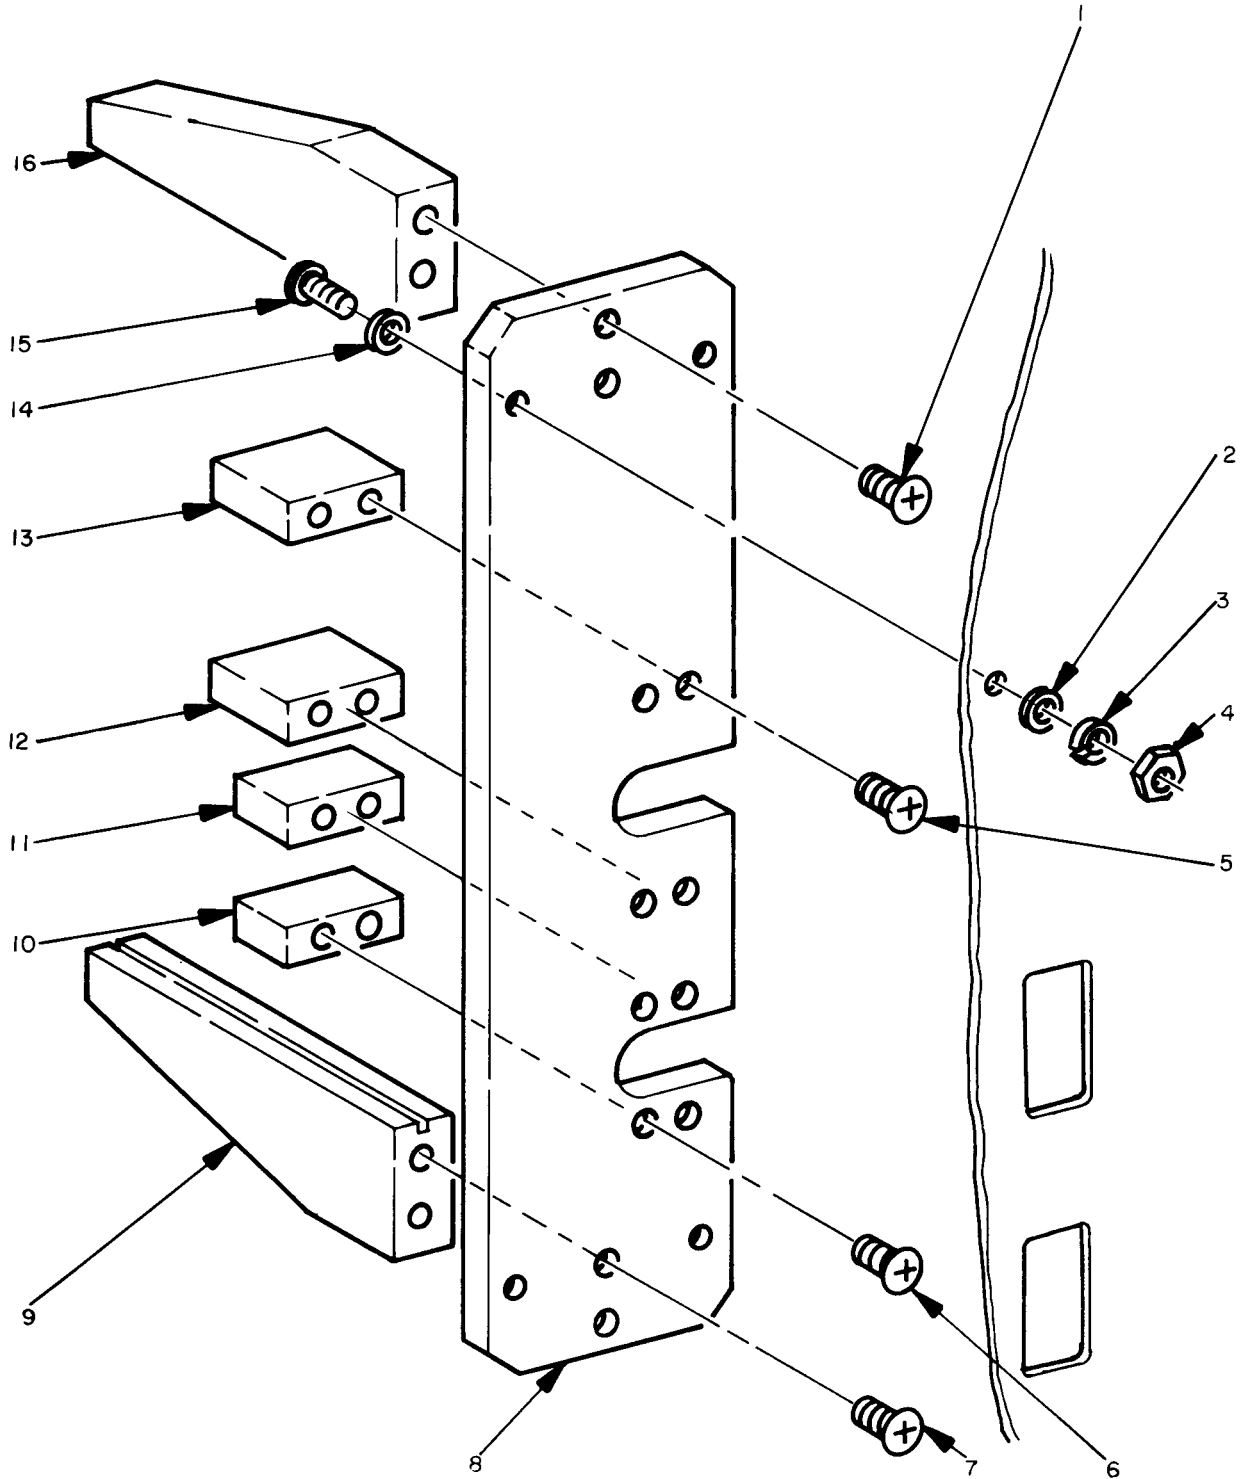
POWER SUPPLY TEST FIXTURE (CARD MOUNTING ASSEMBLY).
